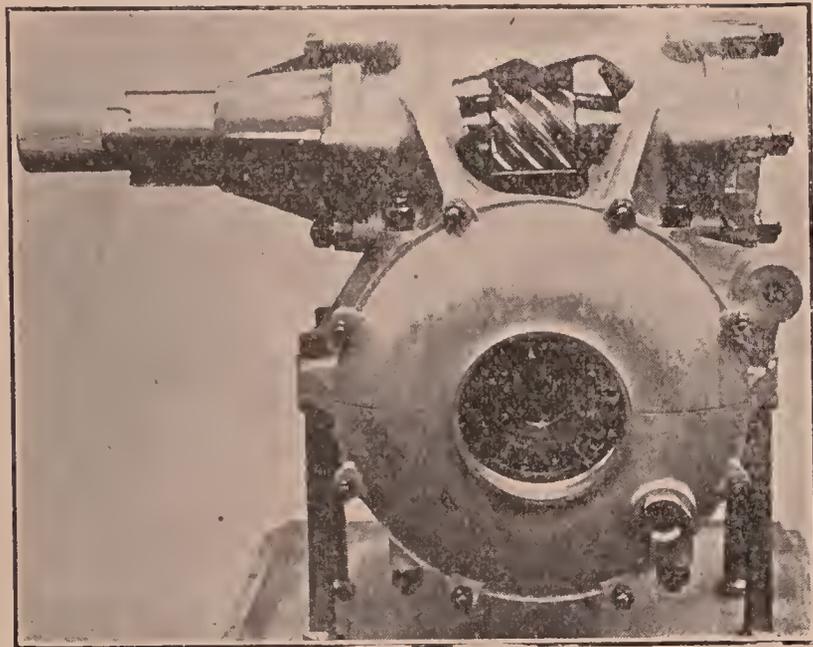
Worm Gear from DeDion Bouton (French) Car, Showing the Use of Worm Shaft Placed Above the Gear.
